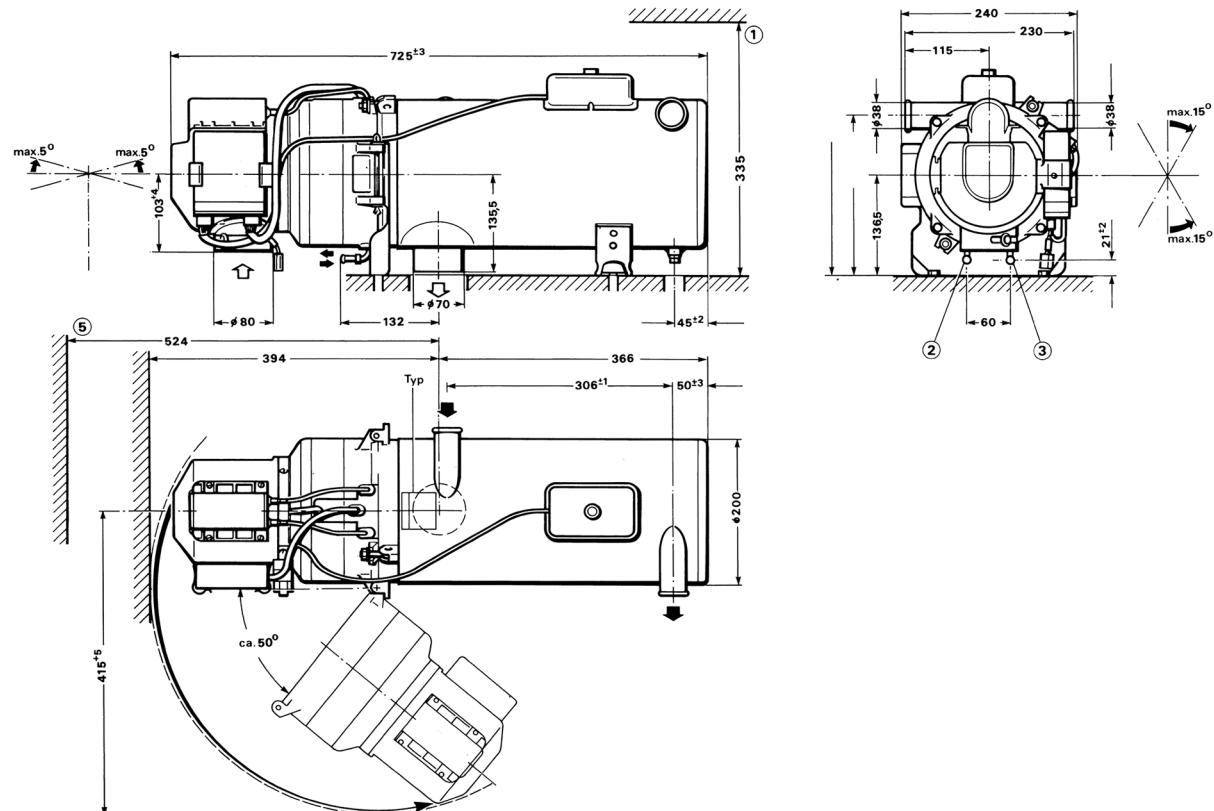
Dimensions of the DBW 350 from .01 up to .10 heaters
